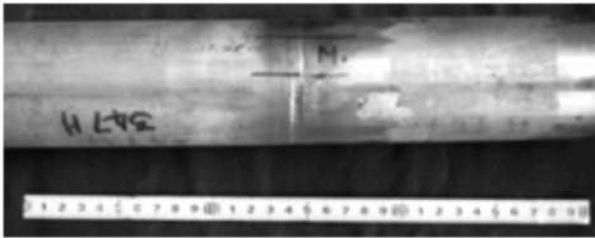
SS 347H tube welded by Inter Pulse TIG process
